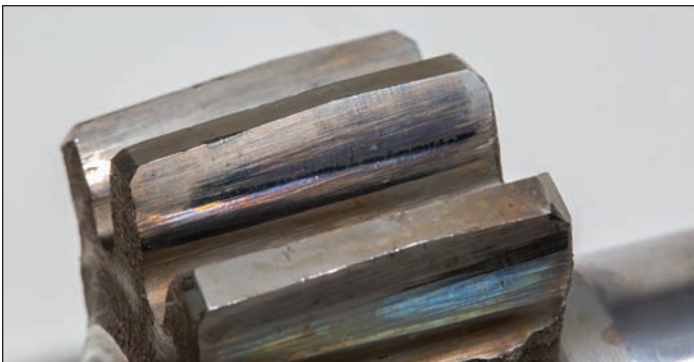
Excessive wear on the sector shaft teeth: this one is headed for the scrap bin.
